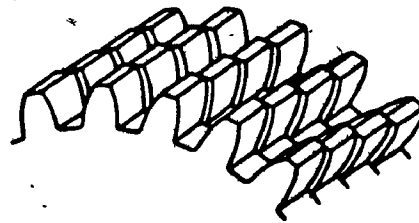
Stepped gears. Helical gears result if the plates are made progressively thinner.
